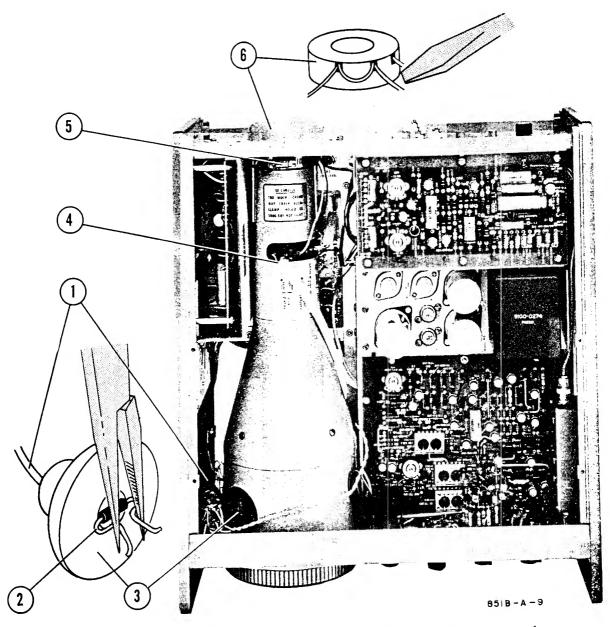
Cathode-Ray Tube, Parts and Connections Involved in Removal
